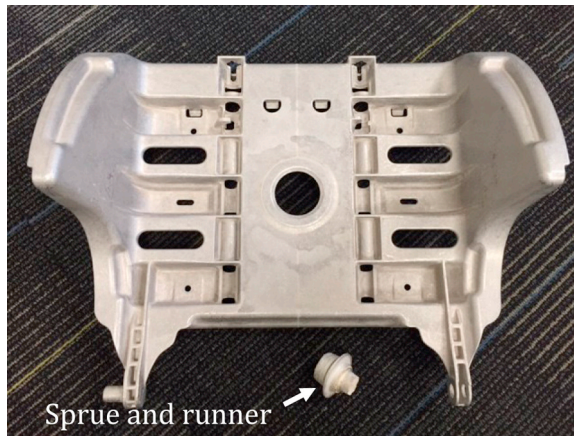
Child's safety auto seat manufactured by Molded Magnesium Products, 1.4kg part thixomolded with a hot long nozzle enabling miniature sprue and runner and 95% metal yield, 430mm × 380mm × 178mm, 2–5mm section thickness. Courtesy Ray Decker, Thixomat, Inc/nanoMAG LLC.
